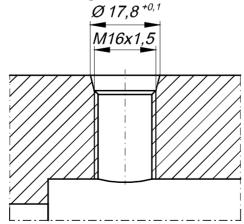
Dimensions of the HF transmitter tap in the quantometer body.
